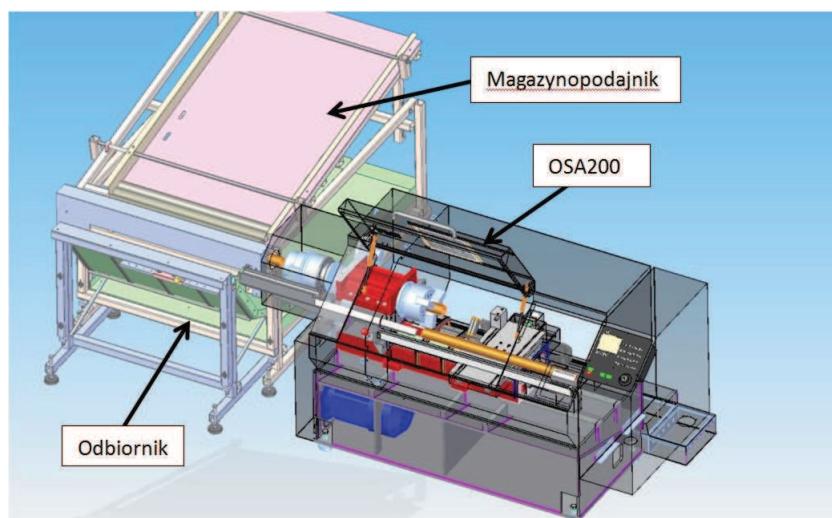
Machine tool OSA adapted for the processing of semi-finished product
